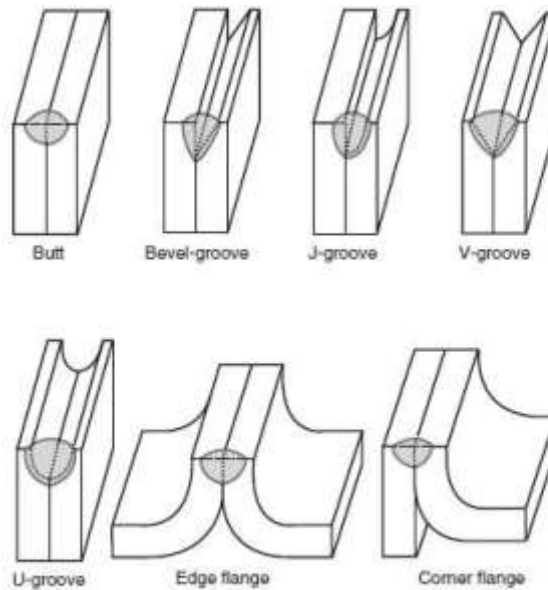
Types of welds that may be made with a basic edge joint.
